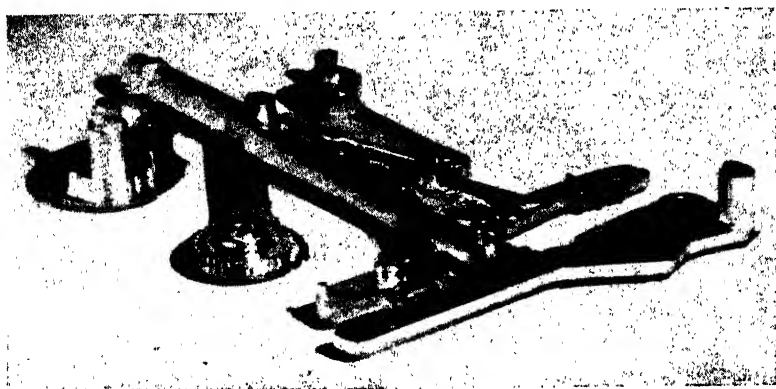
Gate of six zinc-alloy die castings all of which are produced in a single combination die at one filling. No two of the casting are duplicates. Most of them could not be duplicated in stamped form but, if they could be, each would require a separate stamping die with a separate press setup for each die.
